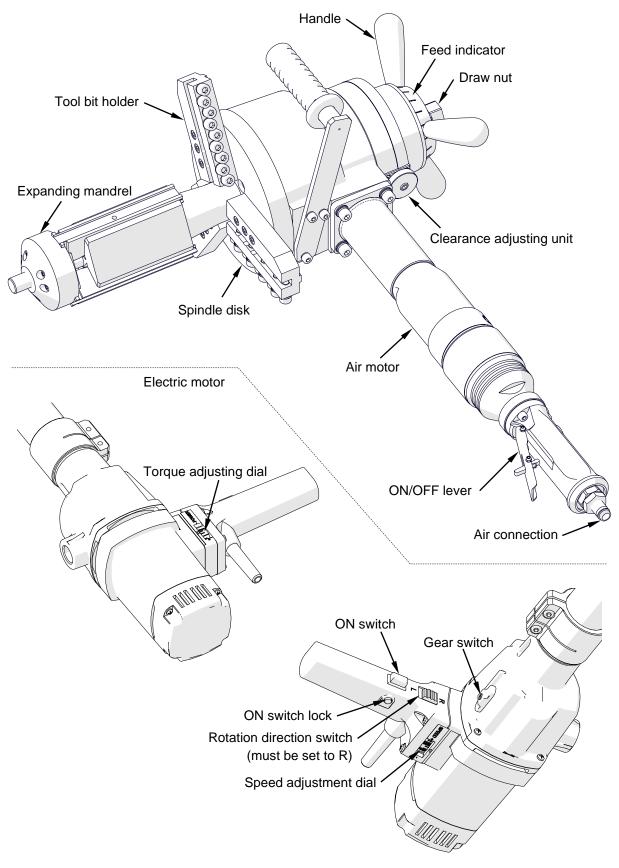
View of the PRO 10 PB and of the PRO 10 PBE electric motor
